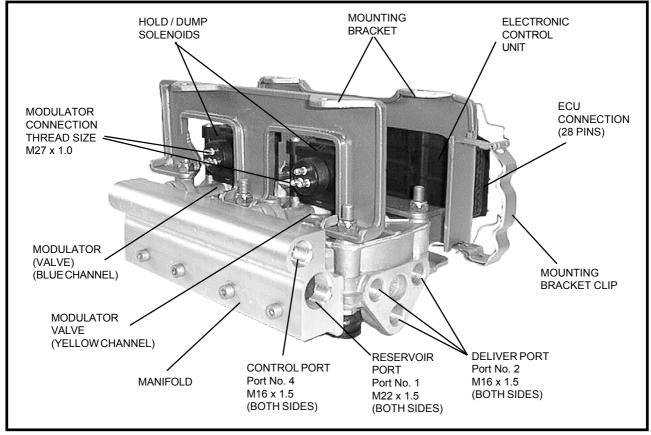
ECU AND MODULATOR ASSEMBLY - MODULAR 2
